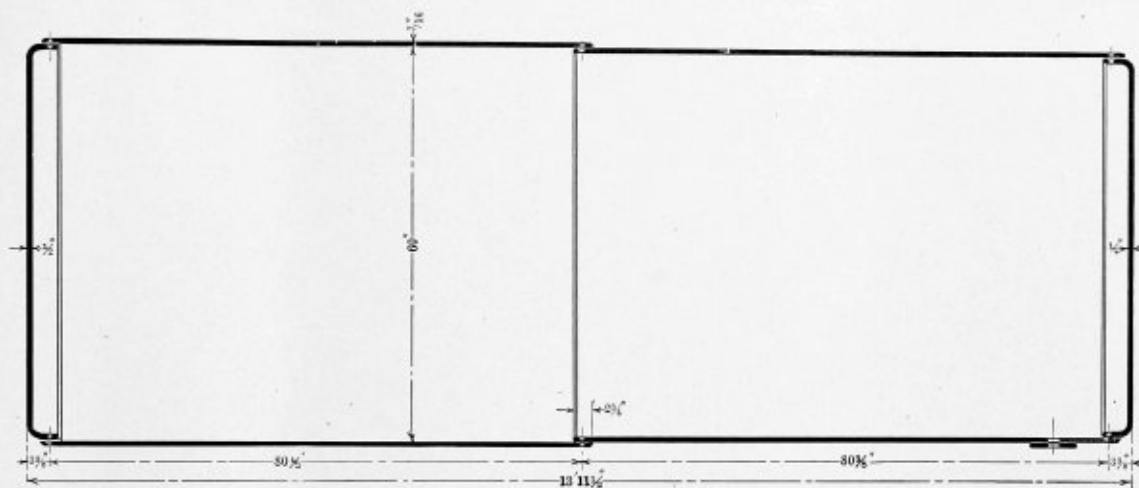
SECTION SHOWING OUTLINE OF BOILER SHELL AND HEADS.
